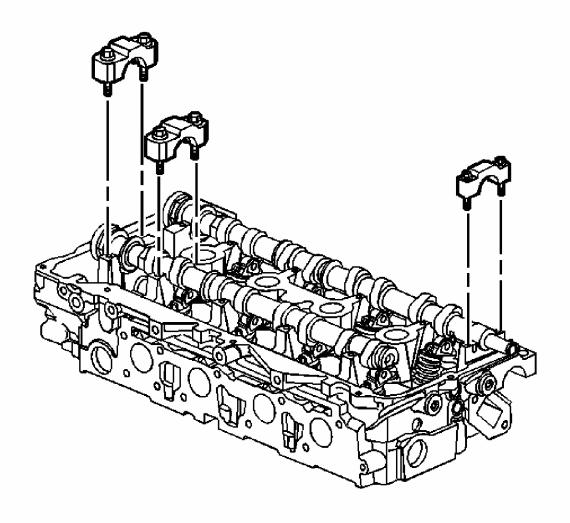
View of Camshaft Bearing Caps Courtesy of GENERAL MOTORS CORP.
